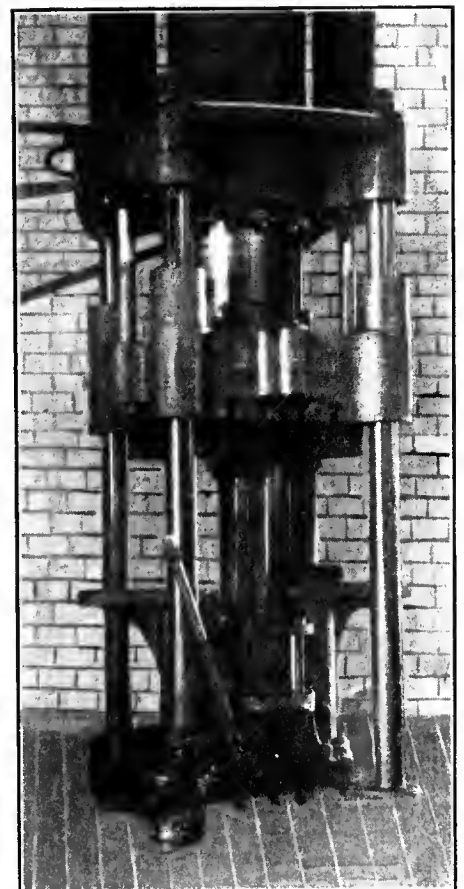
R. D. WOOD CO. 200-TON HYDRAULIC PRESS ON WHICH THE DRAWING OPERATIONS ARE PERFORMED.
